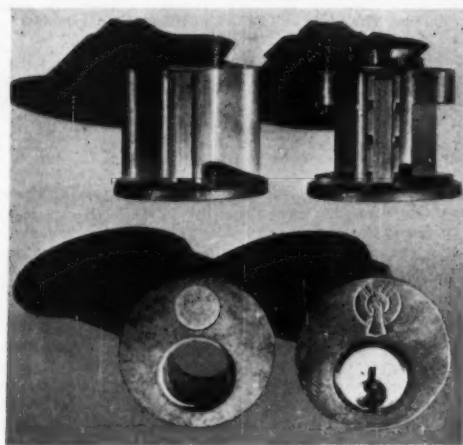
PARTS SHOWN AT LEFT ARE AS PRESSED; THOSE AT RIGHT ARE FINISHED-MACHINED CYLINDERS
